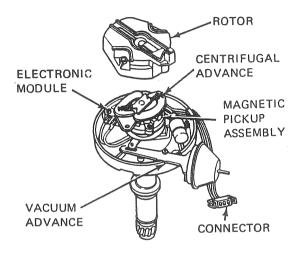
Lower housing components. (Courtesy of General Motors Corp.)
